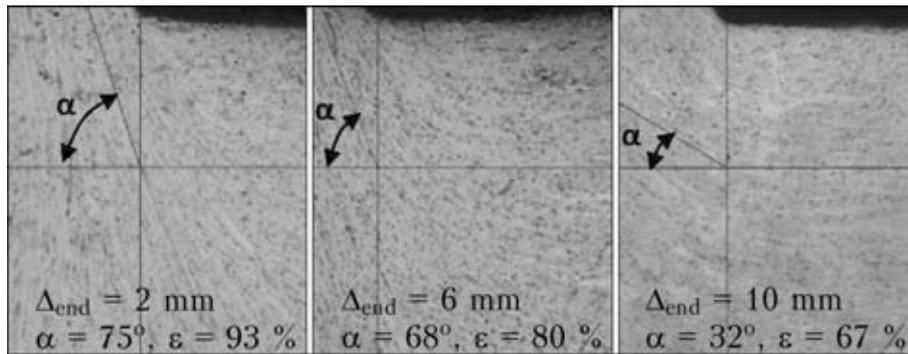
Macrostructures of zone of welded joint (a-c) in welding alloy 1201 of 30 mm thickness at different final degree of deformation
